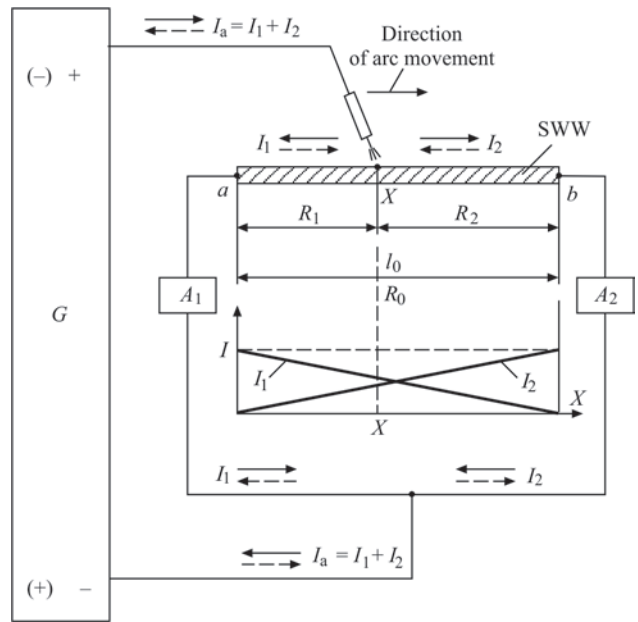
Scheme of resistometric method for determining welding arc spot coordinate and measuring welding speed in SWS (description see in the text: A_1, A_2 are the current sensors in the branches cax and cbx of the welding circuit)
